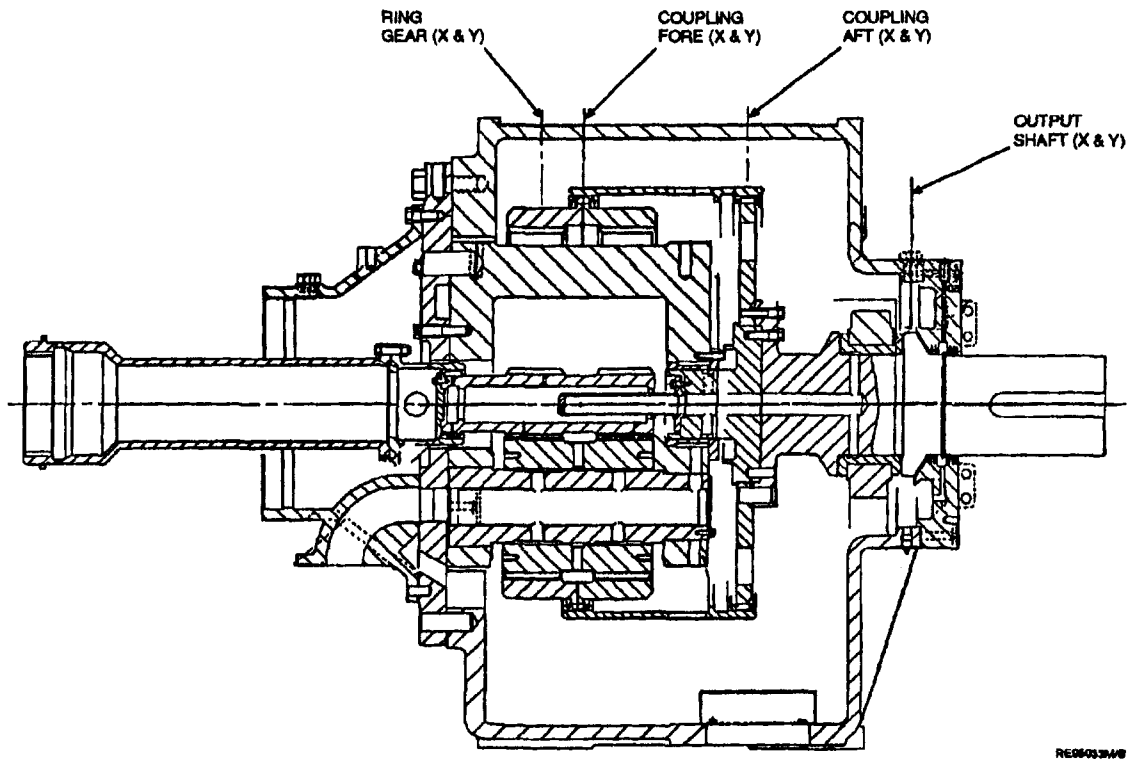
Sectional view of a simple star gearbox (Allen gear design)
